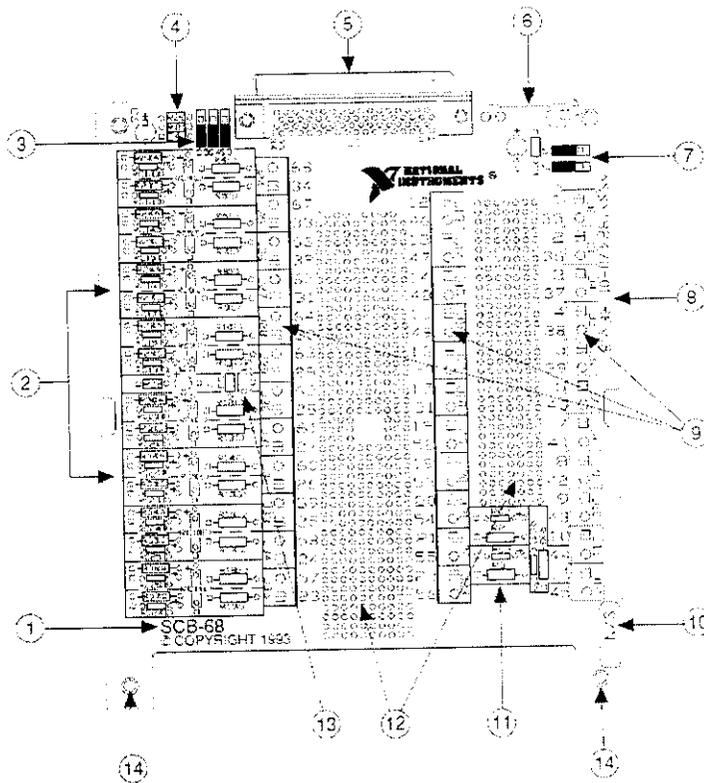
IMAQ SCB-68 Terminal Block Parts Locator Diagram
